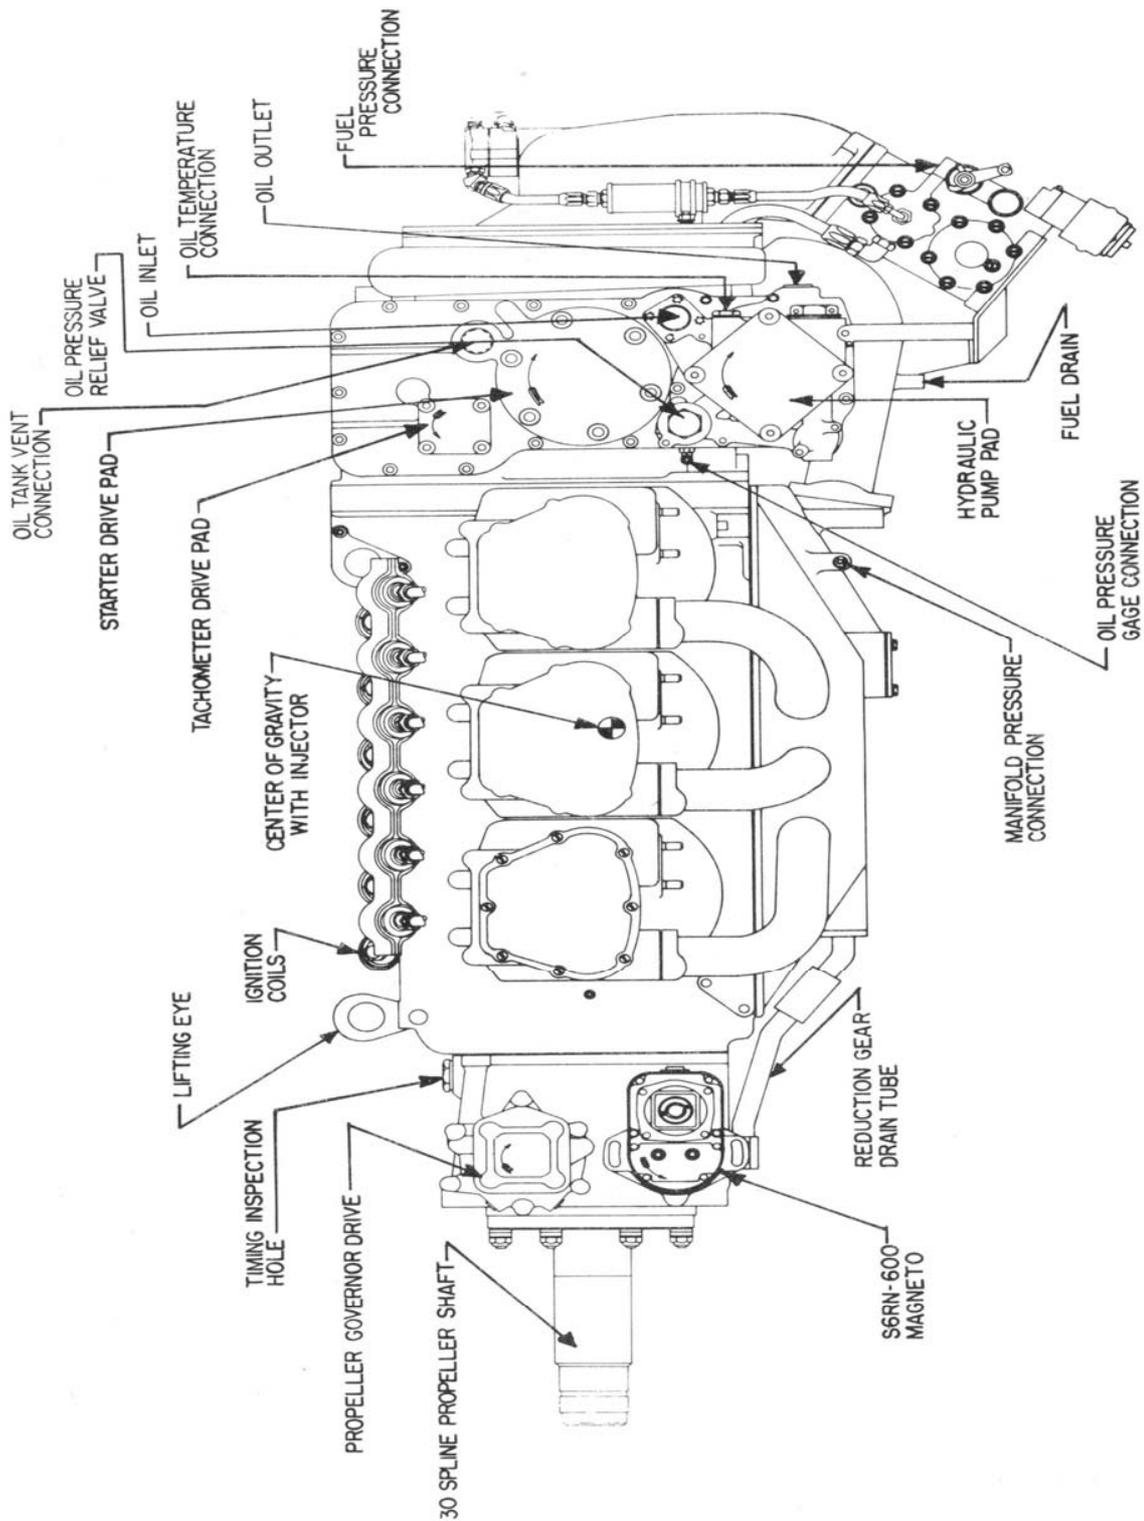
Installation Drawing – IGSO-540-A Series –
